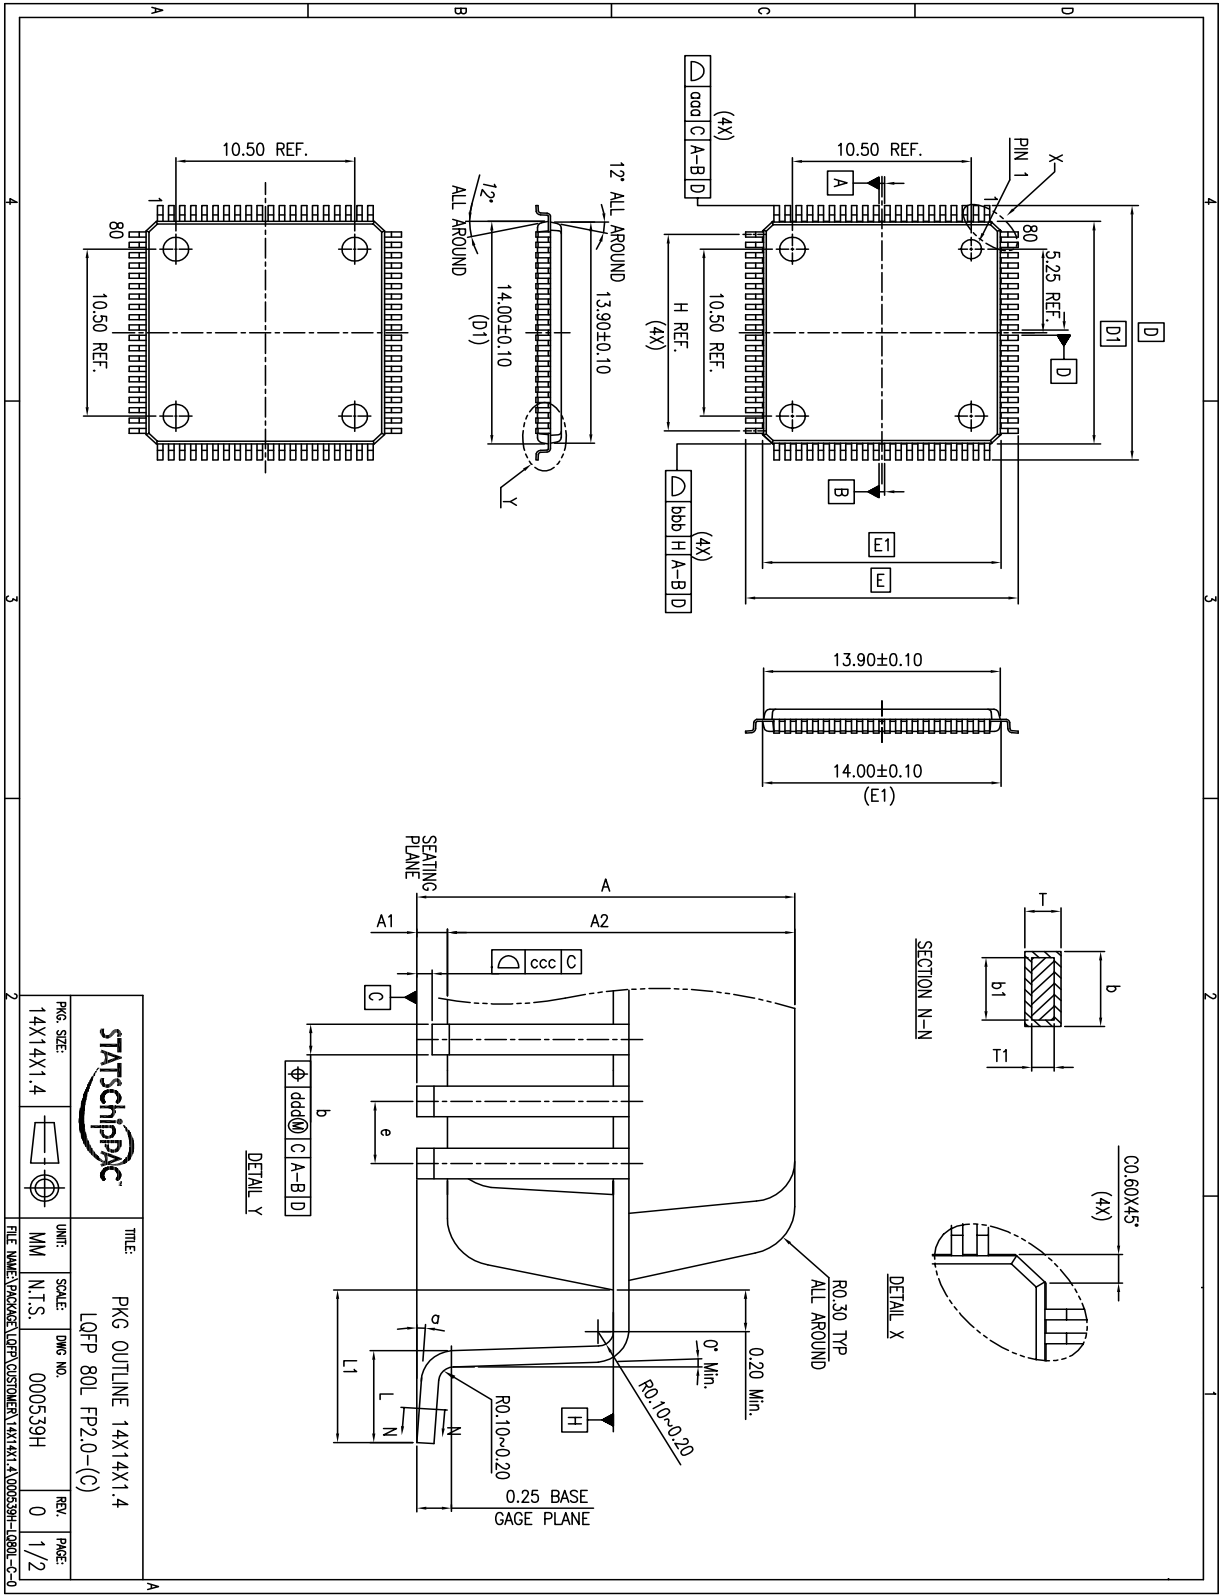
80-Pin Package Outline Drawing (1 of 2)
